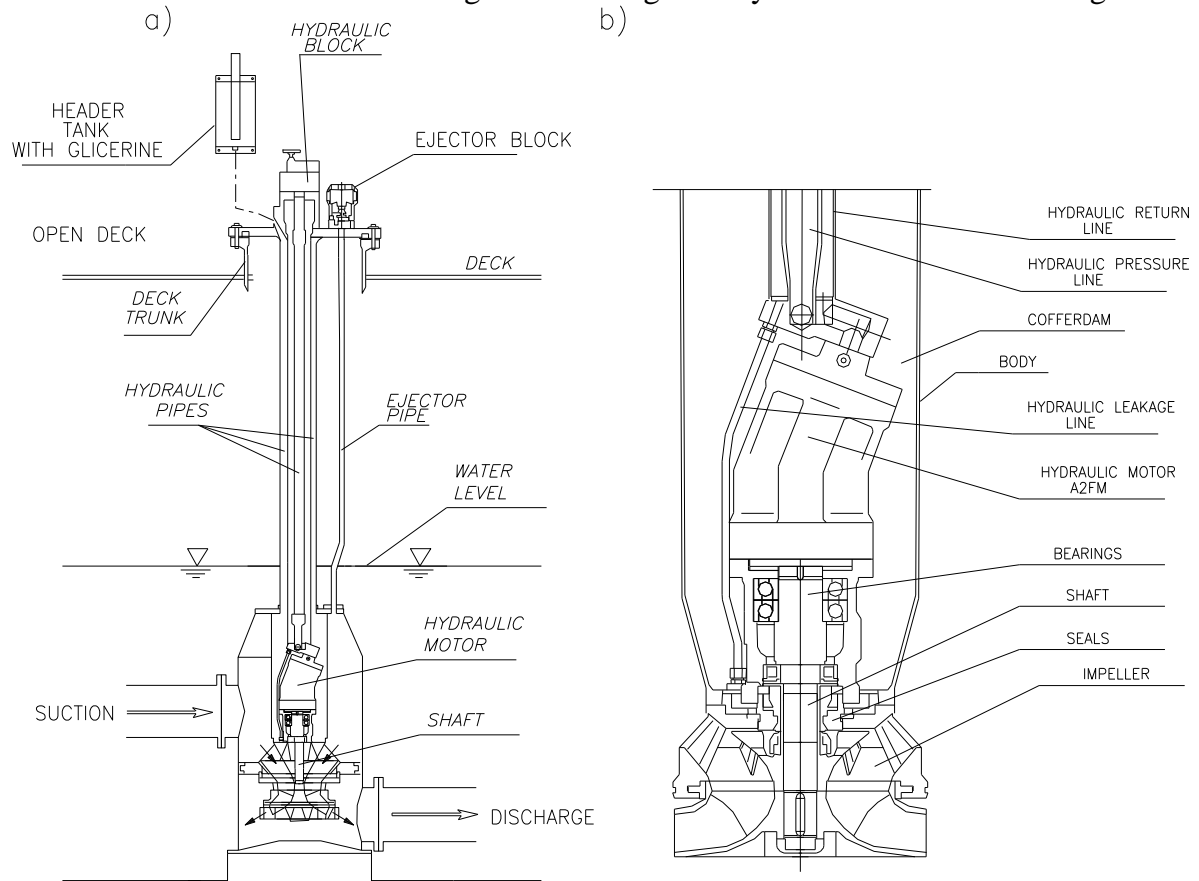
Typical submerged ballast pump with hydraulic drive (Framo/Norway) [5]
